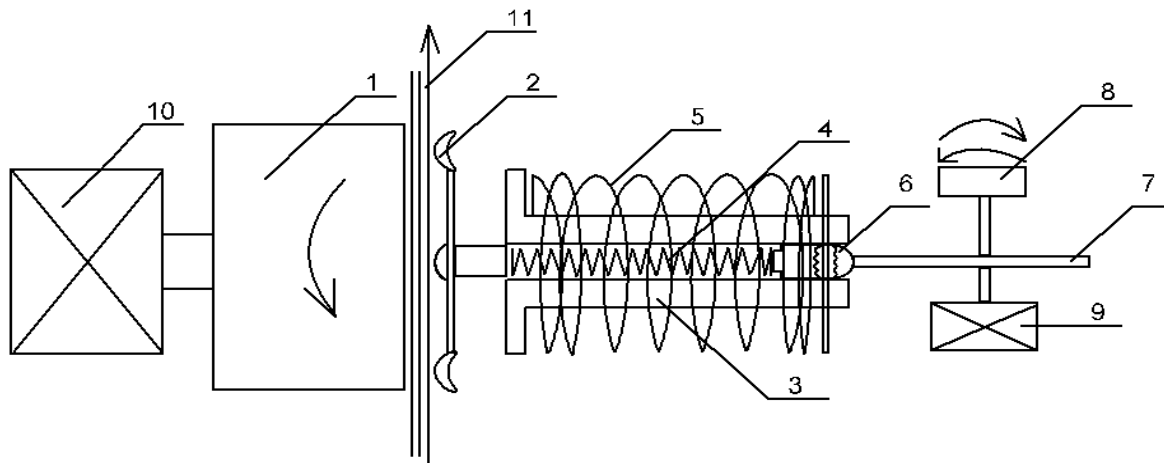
Tension regulating device for combined threads with a compression spring mechanism.
